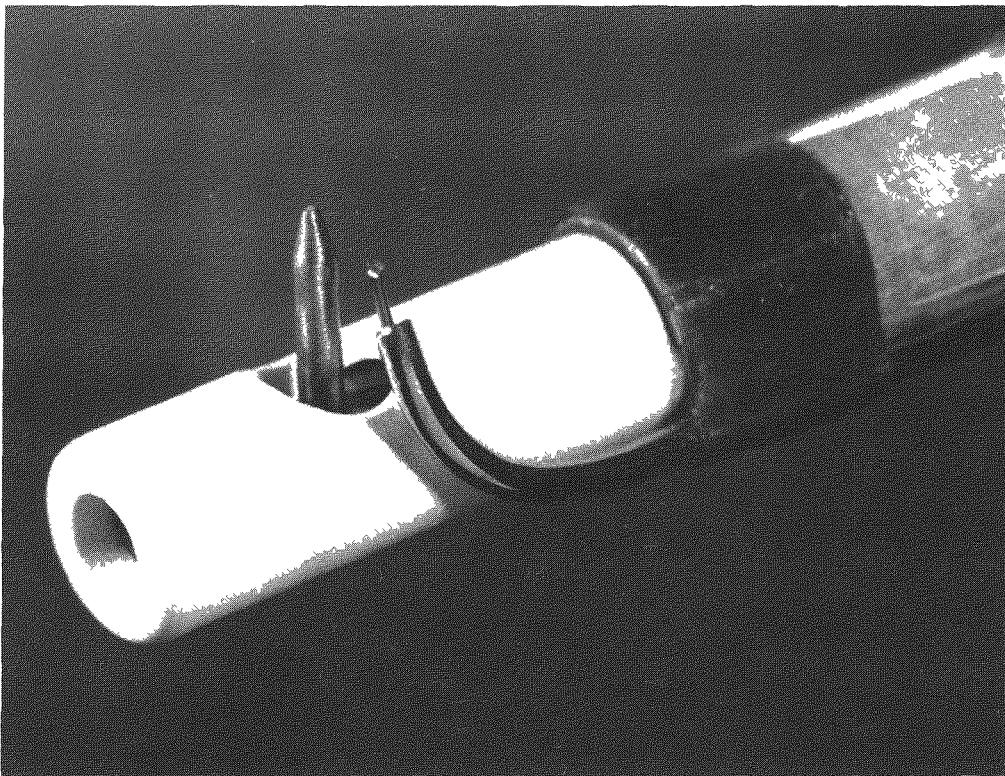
Filler metal guide tube in position to feed 0.64 mm wire into weld puddle.
